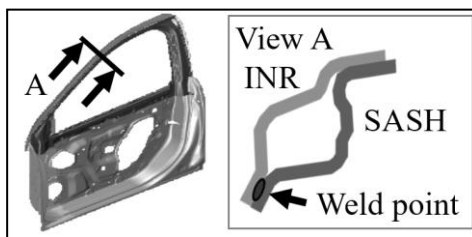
Dimple welding adaption point in aluminum door sash
